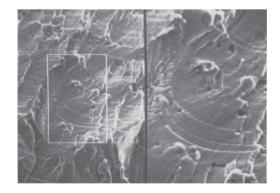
Typical fatigue-fracture surface on metals, showing beach marks. Magnification: left, 500×; right, 1000×. *Source:* After B.J. Schulze and S.L. Meiley and Packer Engineering Associates, Inc.
